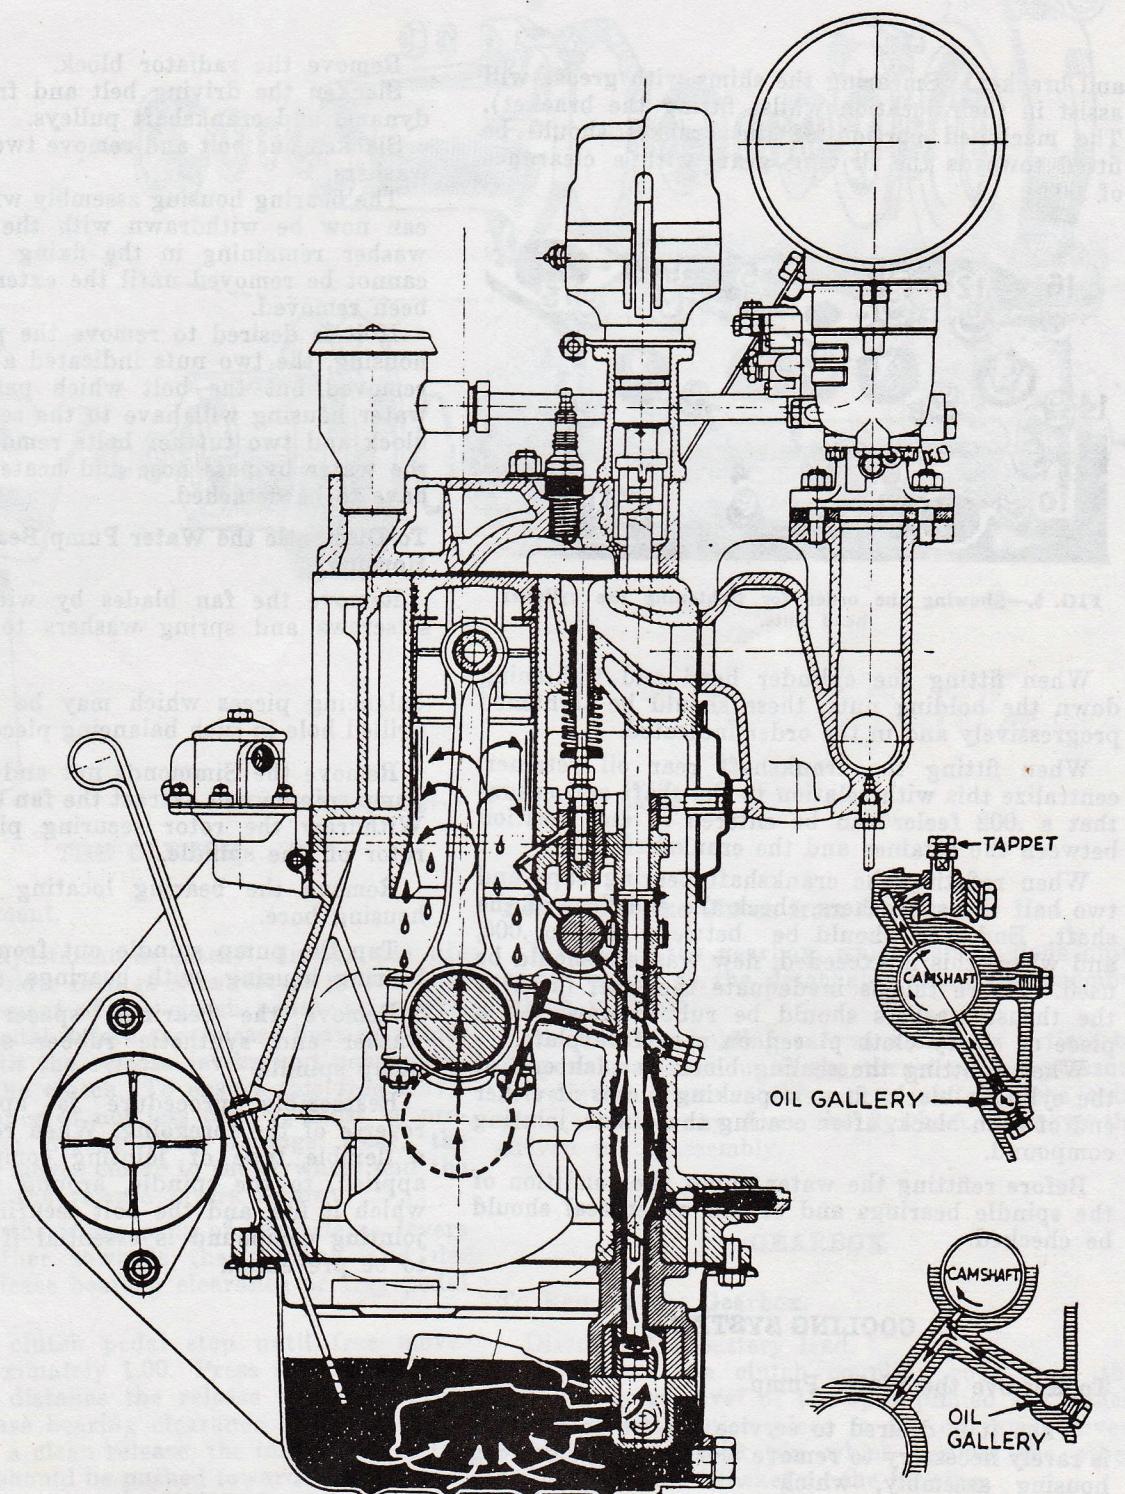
Cross sectional view of the engine showing the oil circulation.
